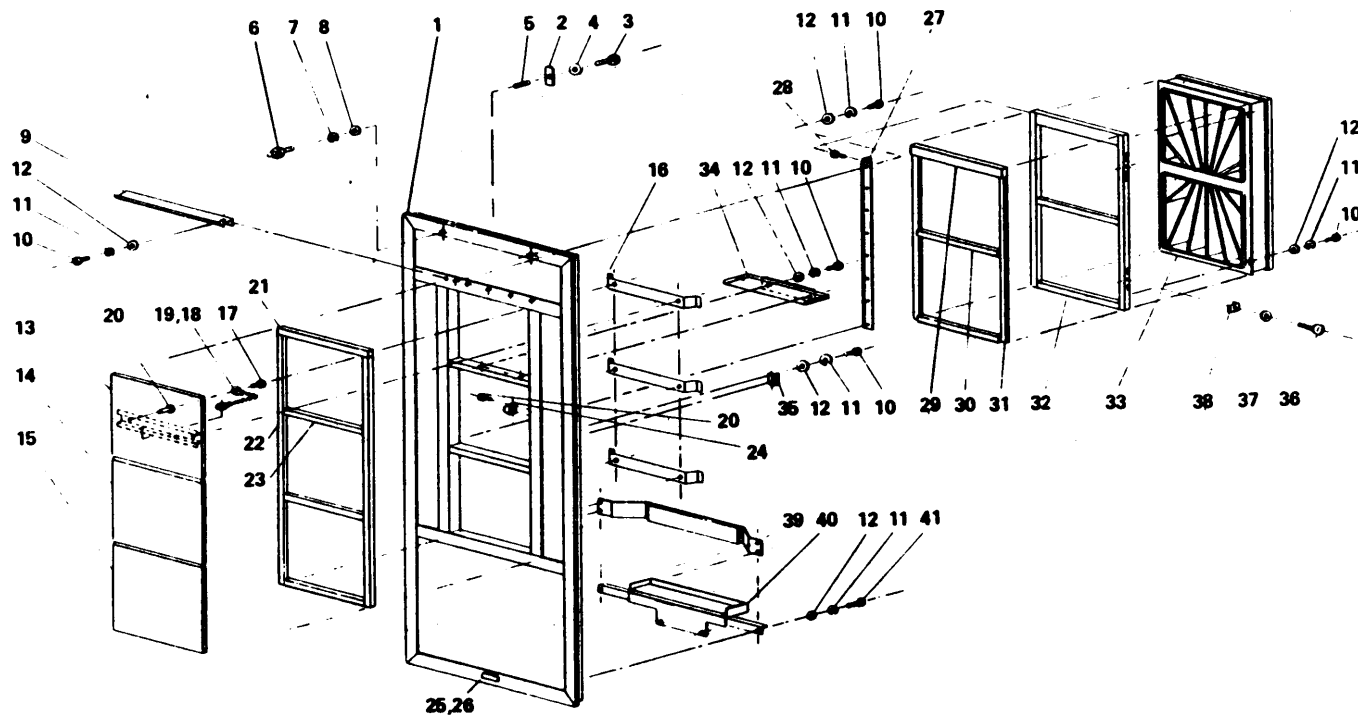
Air Conditioning Mounting Kit, S-389 Shelter (Sheet 1 of 3)
